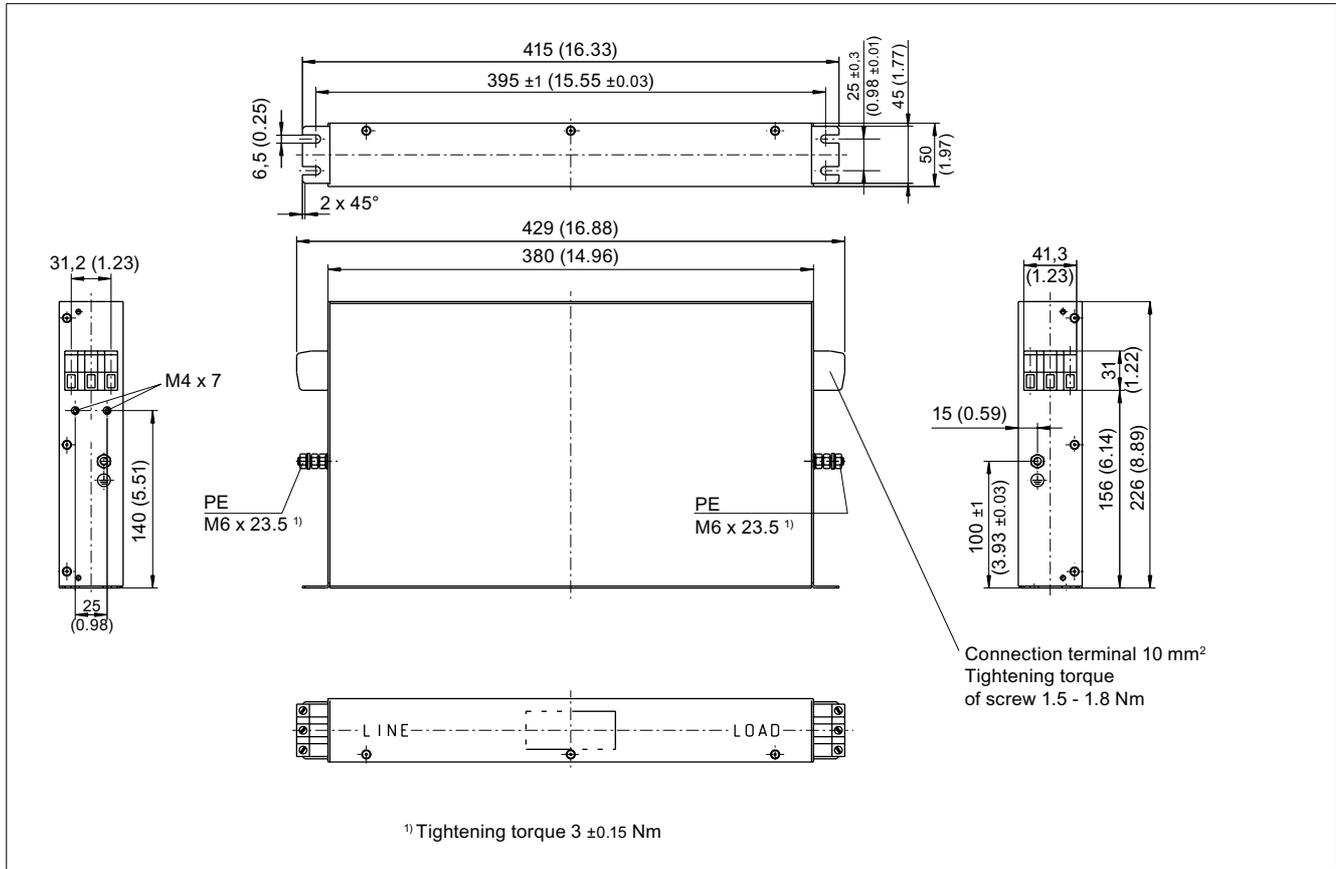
Dimension drawing of Basic Line Filter for Basic Line Modules 20 kW, order number 6SL3000-0BE21-6DAX, all dimensions in mm and (inches)
